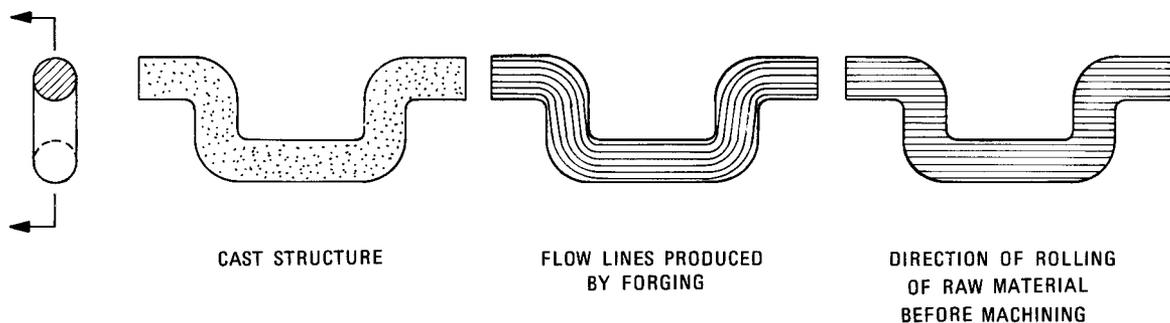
Comparison of Directional Structure of Cast, Forged, and Machined Parts (from Ref. 25).
